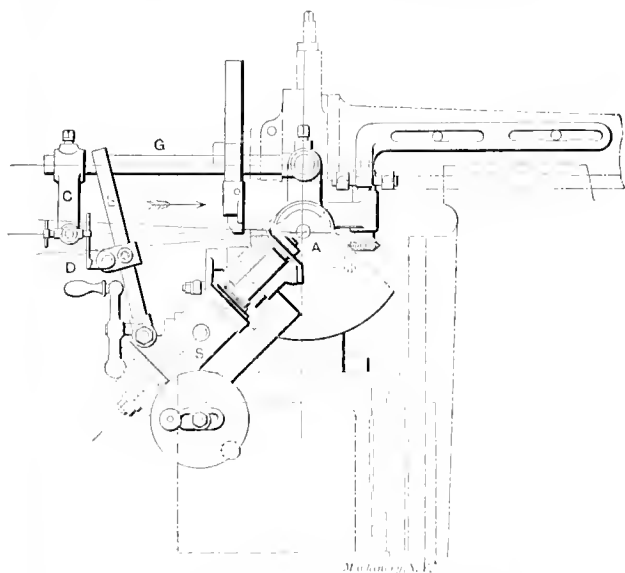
A German Shaper Attachment for Forming the Teeth of Bevel Gears on the Templet Principle.
